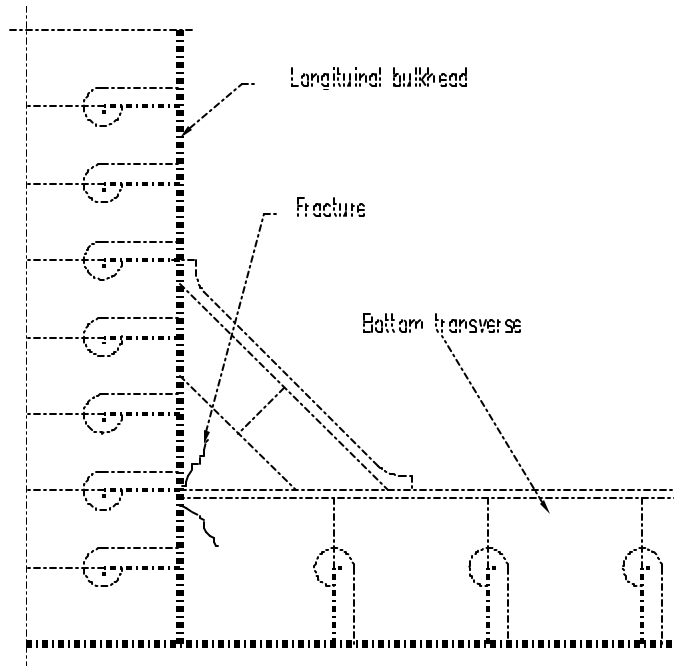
Fractured centre tank bottom transverse end bracket, symmetrical face plate.
